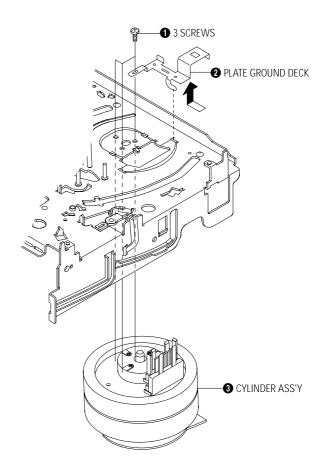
Plate Ground Deck, Cylinder Ass'y Removal
